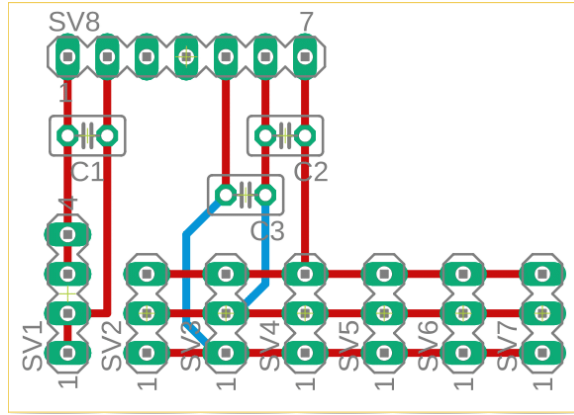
5V to +/-12V DC-DC Conversion PCB using DCH01
